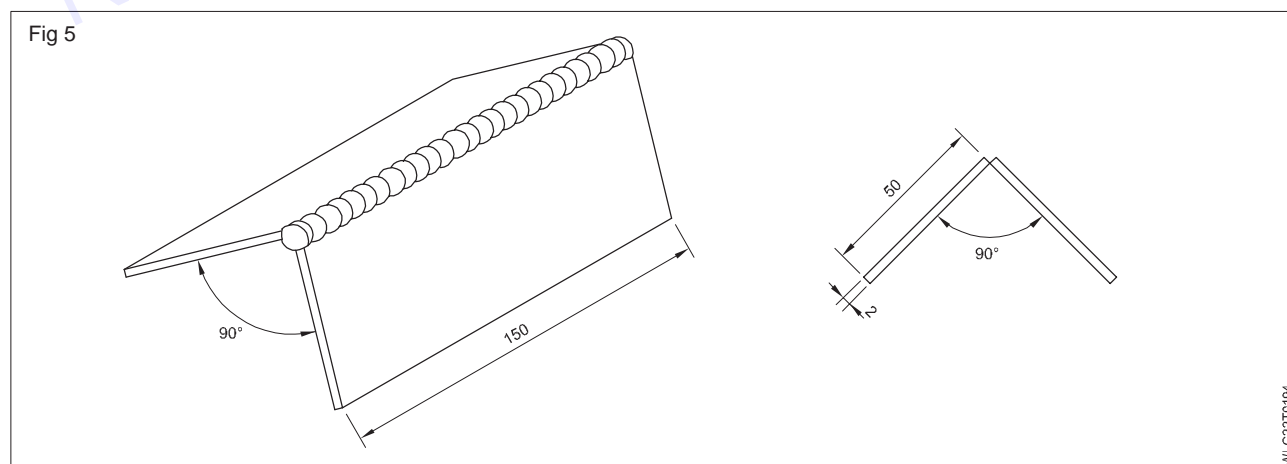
shows the corner joint welded by TIG process. It also gives the set up for making the outside corner joint in flate position.
